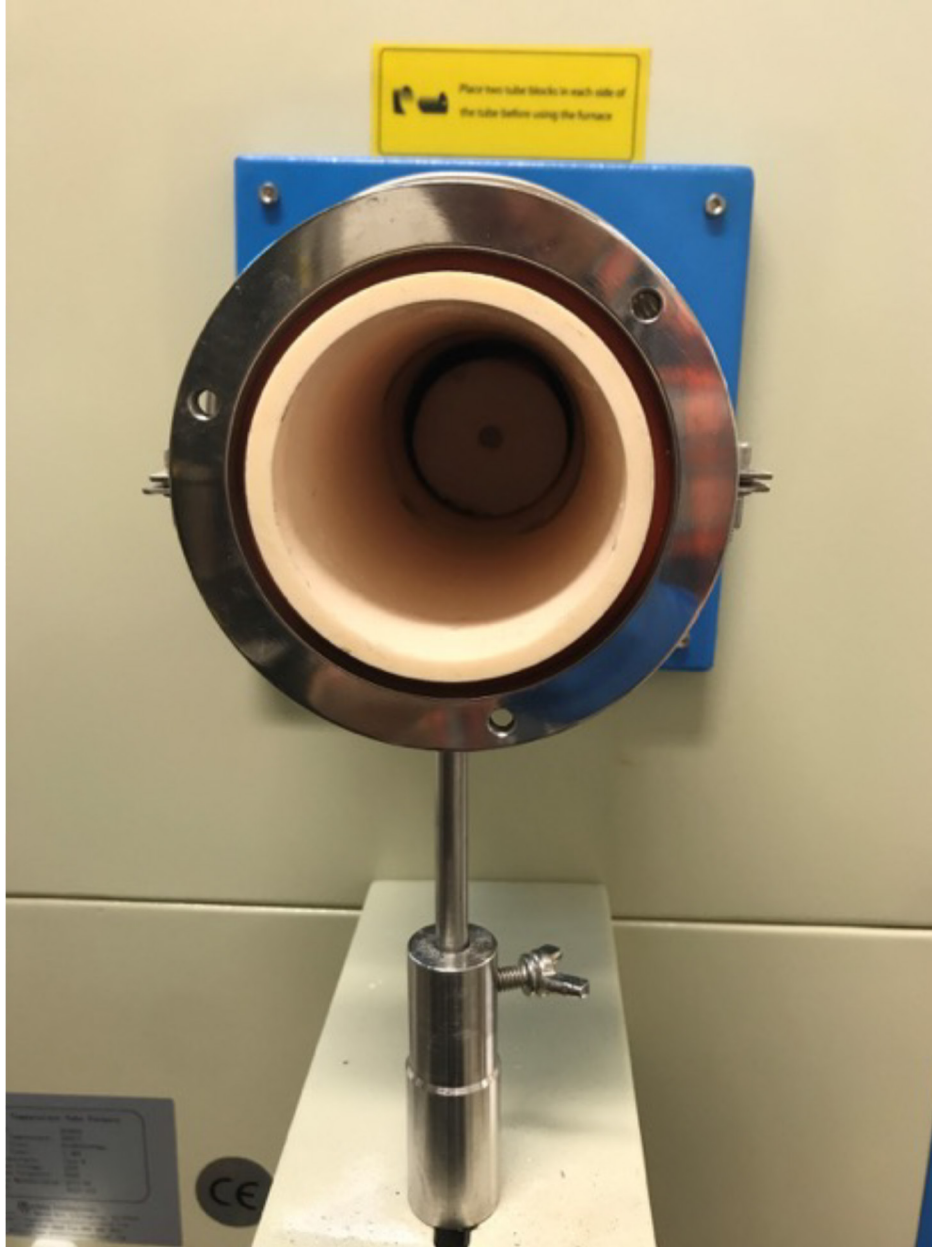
Tube furnace used to PWHT tungsten hex cans.
